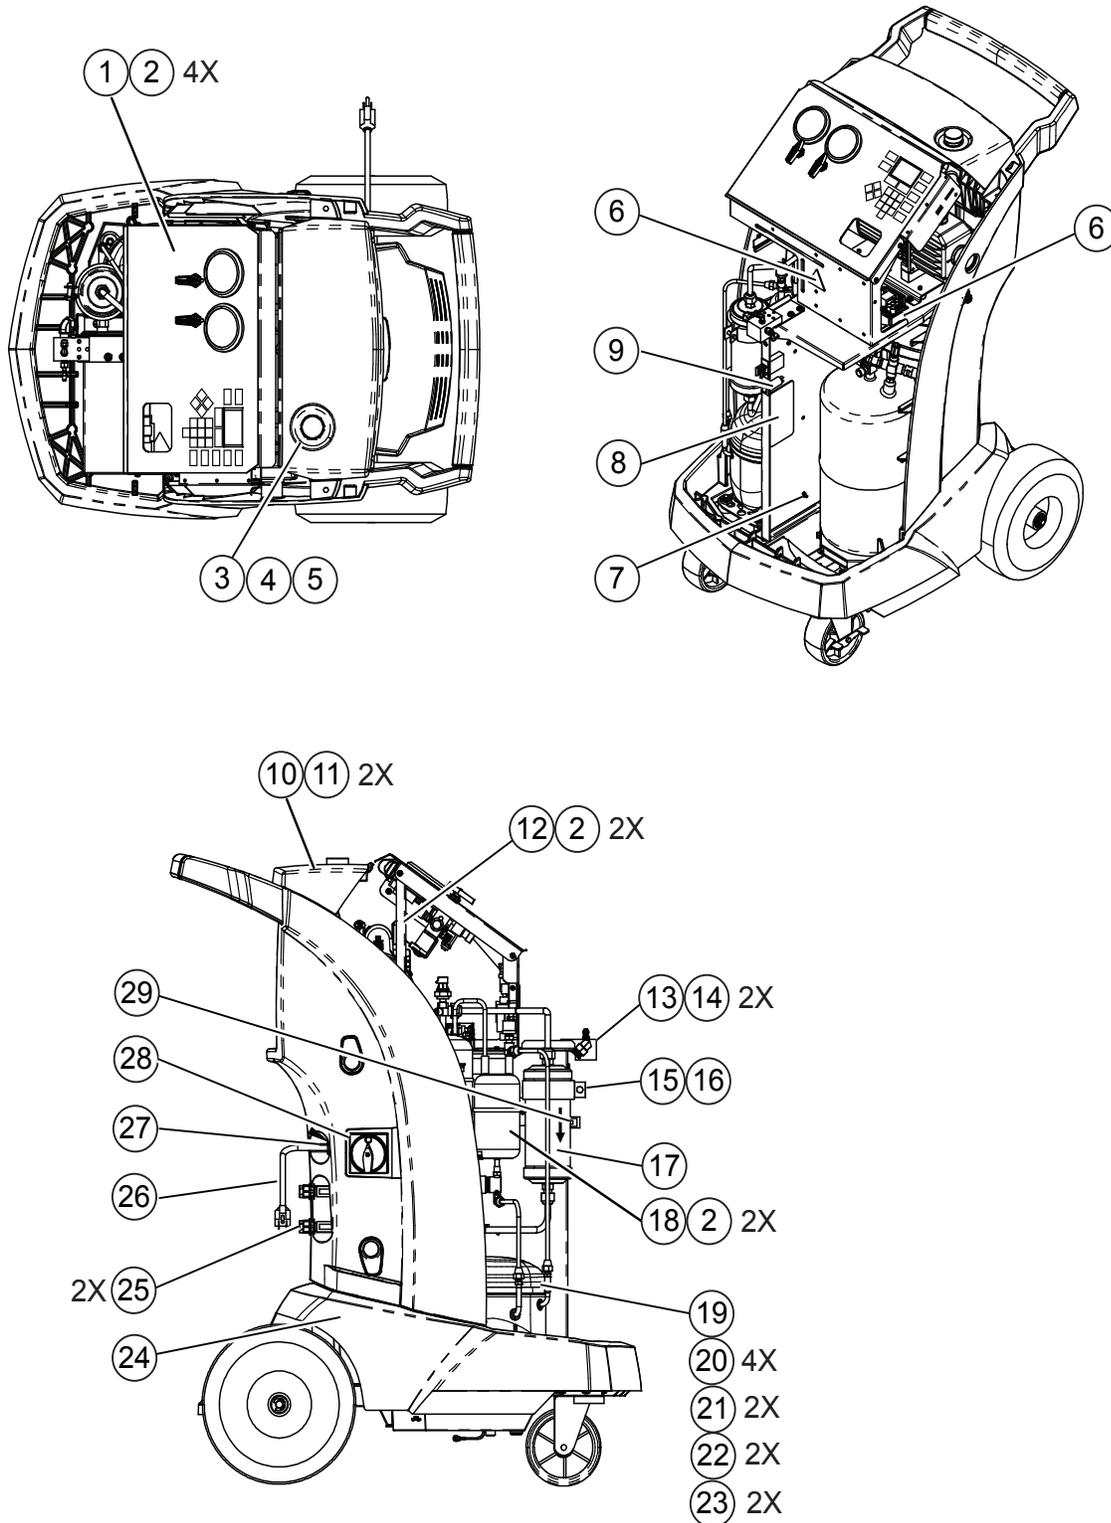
Internal Assembly (Sheet 1 of 2)
